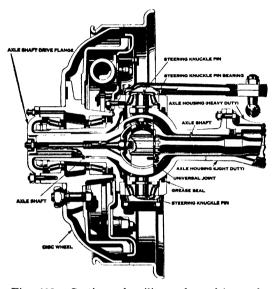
Section of military front-drive axle showing arrangement of universal joint and steering linkage to produce front drive in a steering axle
